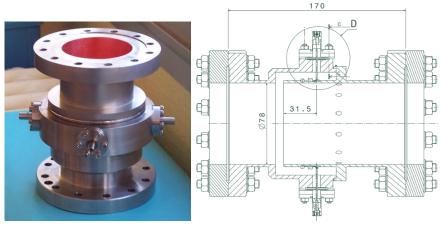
Photography and drawing of the re-entrant cavity BPM.
